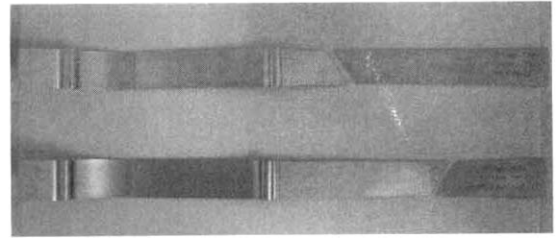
Fracture view of aluminum steel sheets(GC45 thickness 1.2 mm) for rectangular bead.
